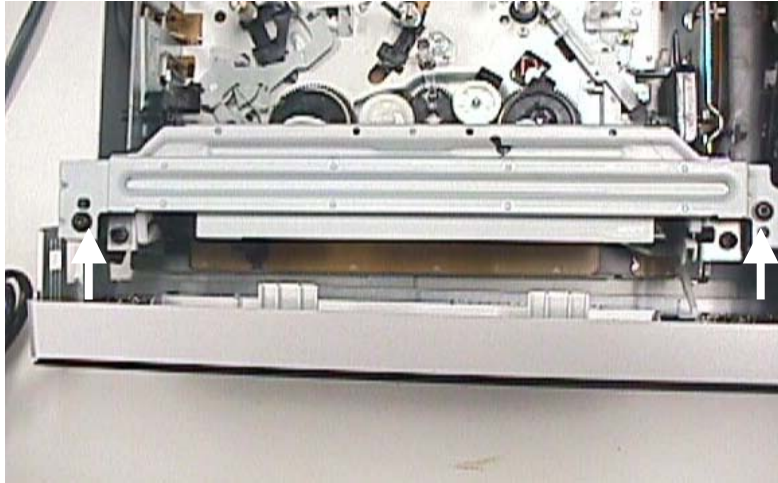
Detach the Front Panel; unscrew the Top Bracket mounting screws
